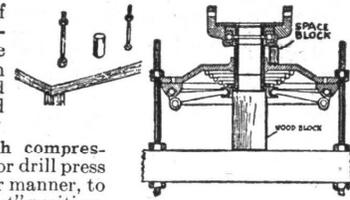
B. The clutch compressor in use. An arbor or drill press may be used in a similar manner, to hold the clutch in the "out" position.
